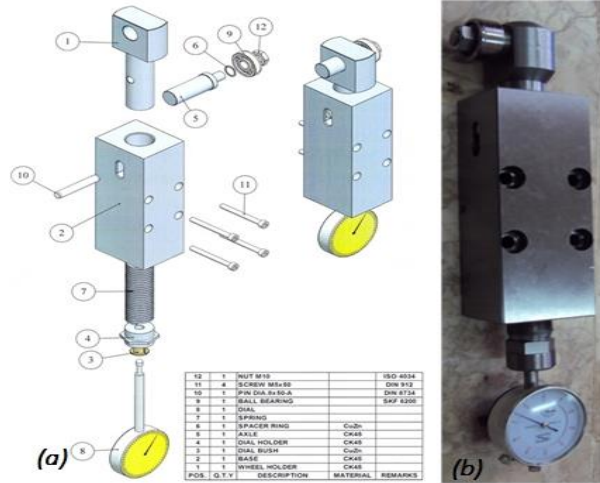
Roller Burnishing Tool: (a): designed using CAD software, and (b): prototype.
